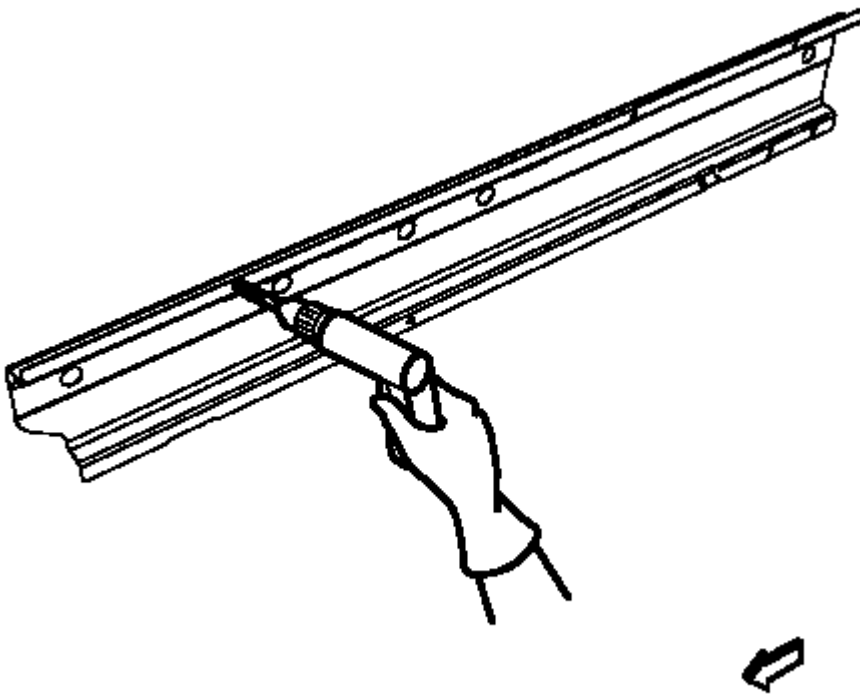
Drilling 8 Mm (5/16 In) For Plug Welding Along Edges Of Service Panel
